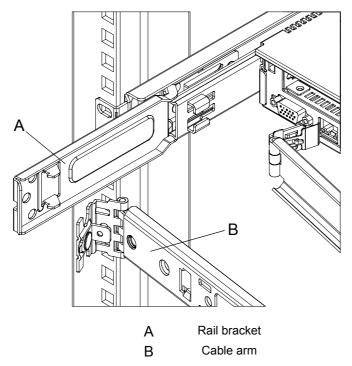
11: Installing the Cable Arm on the Rail Bracket
